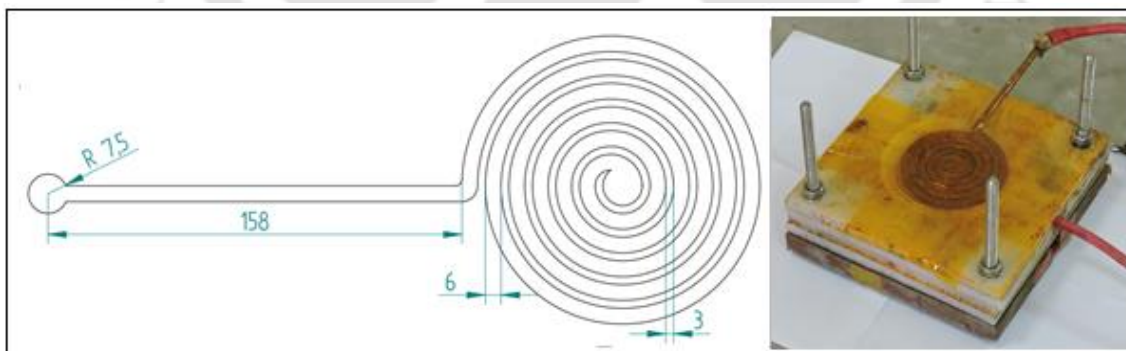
Schematic diagram of the coil tool & the actual copper coil engraved in the nylon casing.
